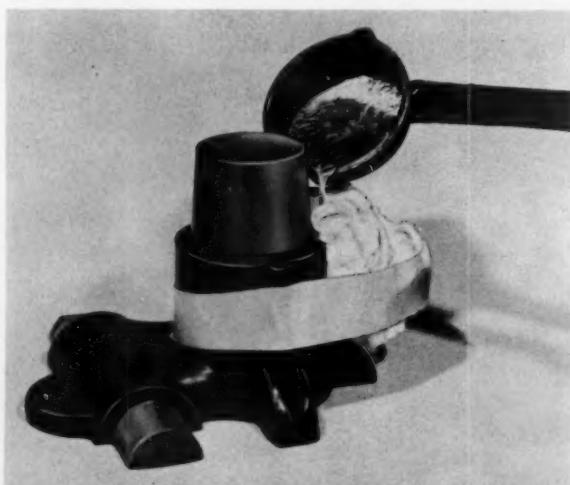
Pouring fusible alloy 5 to fill loose piece impression and section of pattern.
